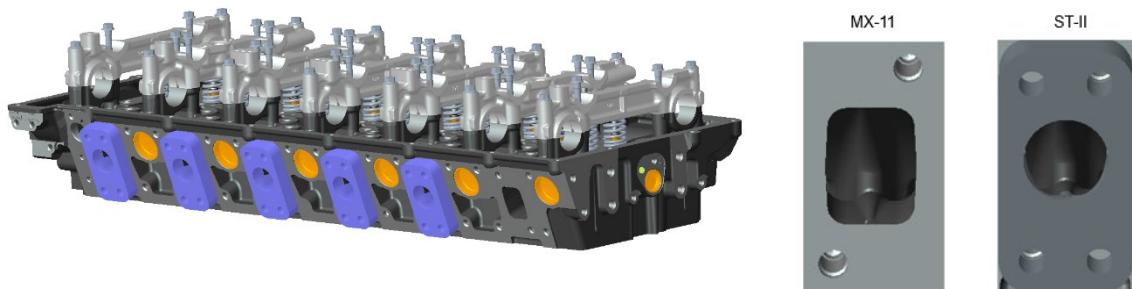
Cylinder Head with Exhaust Port Inserts for Reduced Exhaust Volume
